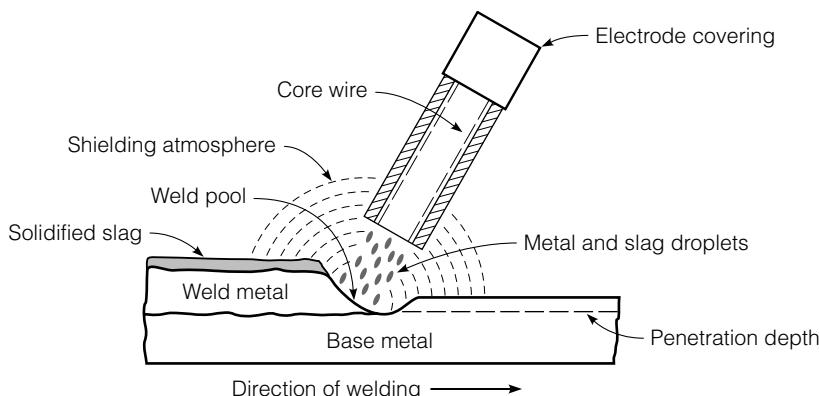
Schematic drawing of arc welding.
